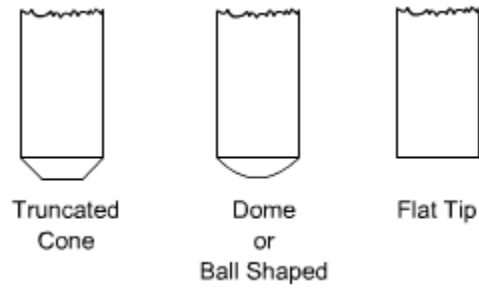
Electrode Shapes for Spot Welding
